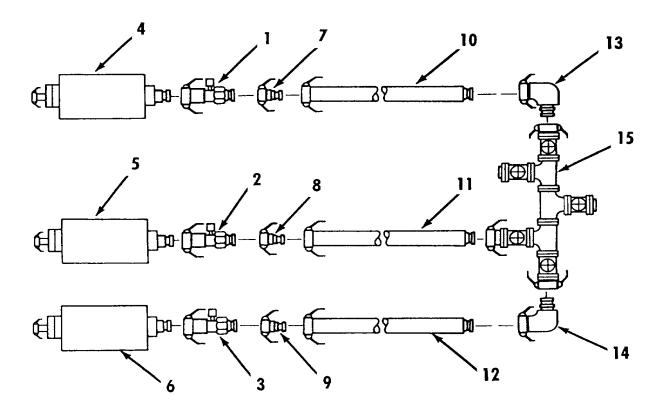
Fuel System - 200 GPM Filter Separator to Fueling Manifold With Five Valves Removal.
